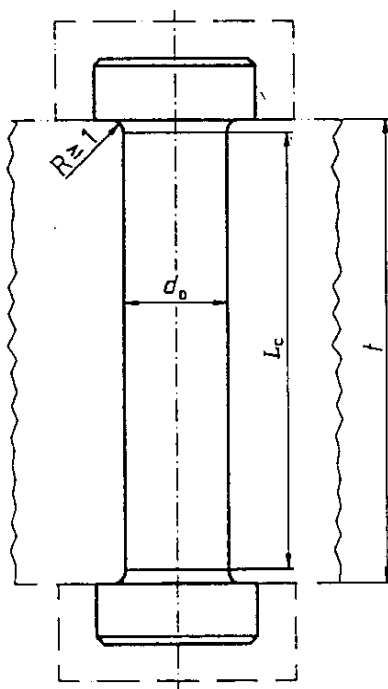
Type and preparation of test pieces with two extension pieces, where $15 \text{ mm} \leq t \leq 100 \text{ mm}$
